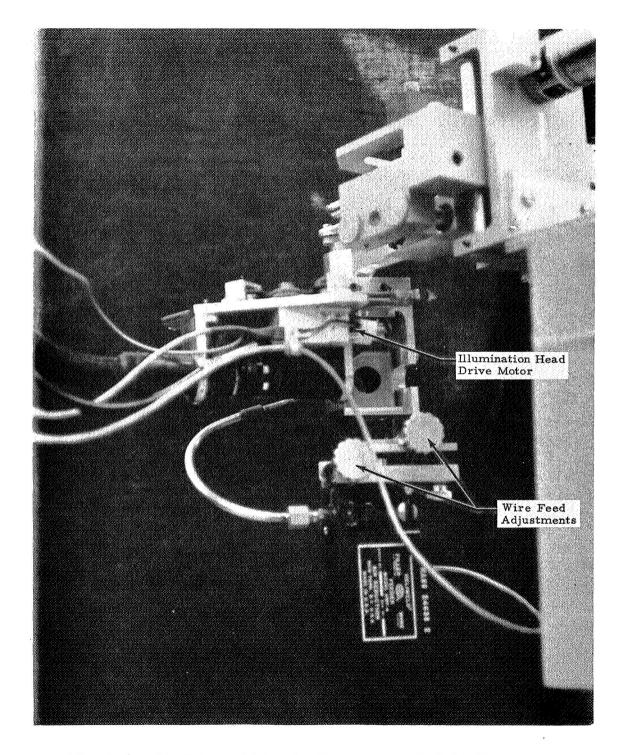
Aft View of Illumination Head and Cold-Wire Feed Mechanism Assembled to Torch Angle Manipulator
